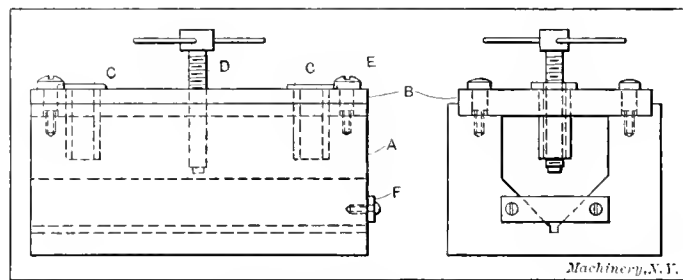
Jig with Removable Top and V-shaped Locating Surfaces for Drilling Shaft Ends
